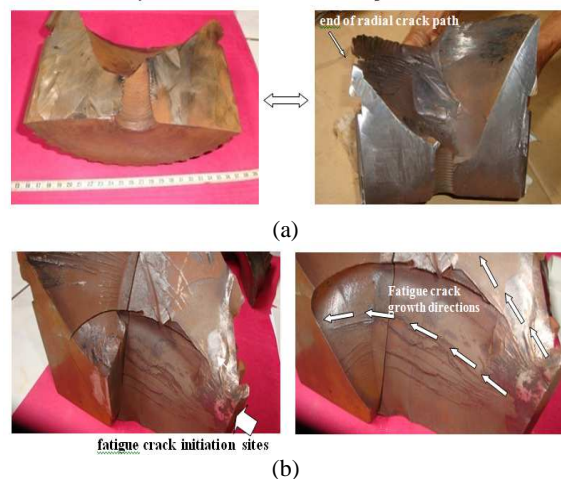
(a) The cup fracture sections of the broken quill shaft A after being cut-off into two pieces (continued). (b) Close up view of the surface fracture area, showing fatigue crack growth in two different directions. Under the splines area, the fatigue crack grew in a combined direction of transverse and radial, while outside the splines area the fatigue crack grew approximately 45° to the shaft axis and later turned in radial direction along the body shaft circumference to form a final typical cup fracture area
